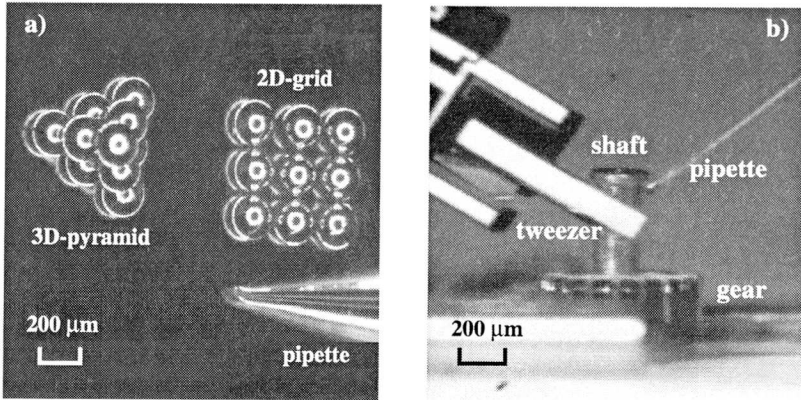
Benchmark tests: (a) 2D (grid) and 3D (pyramidal) structures assembled with metallic balls, (b) assembly of a planetary gear using hand-in-hand operation between tweezers and pipette.
